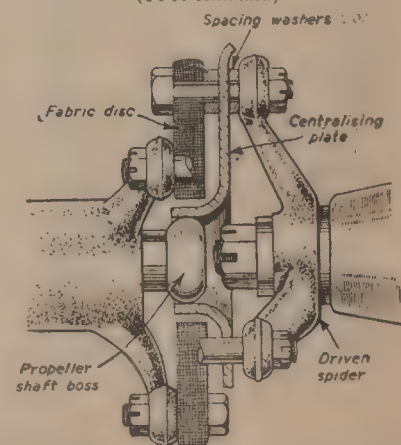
If the fabric universal joints fitted to 1935 models are dismantled they should be reassembled as shown. It is particularly important that the centring plate should be correctly fitted.
